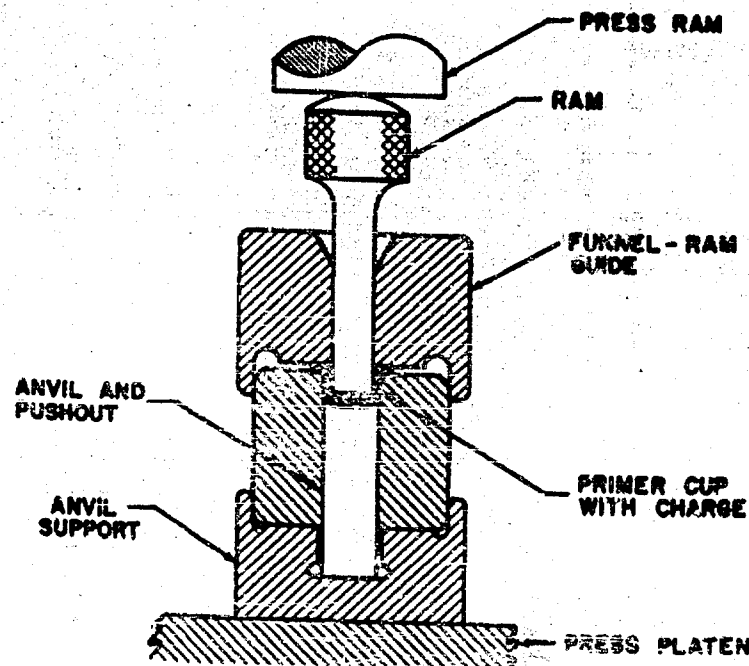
Primer Loading Tool for Mk 101 Type Primer. Sectional View.
